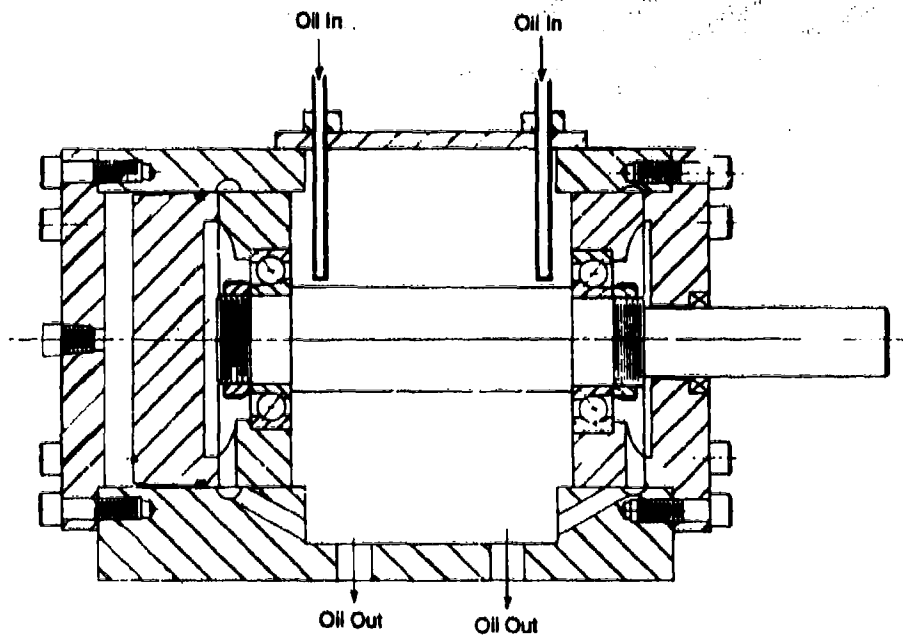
Cross Section of 40-mm-Bore Ball Bearing Test Rig.
